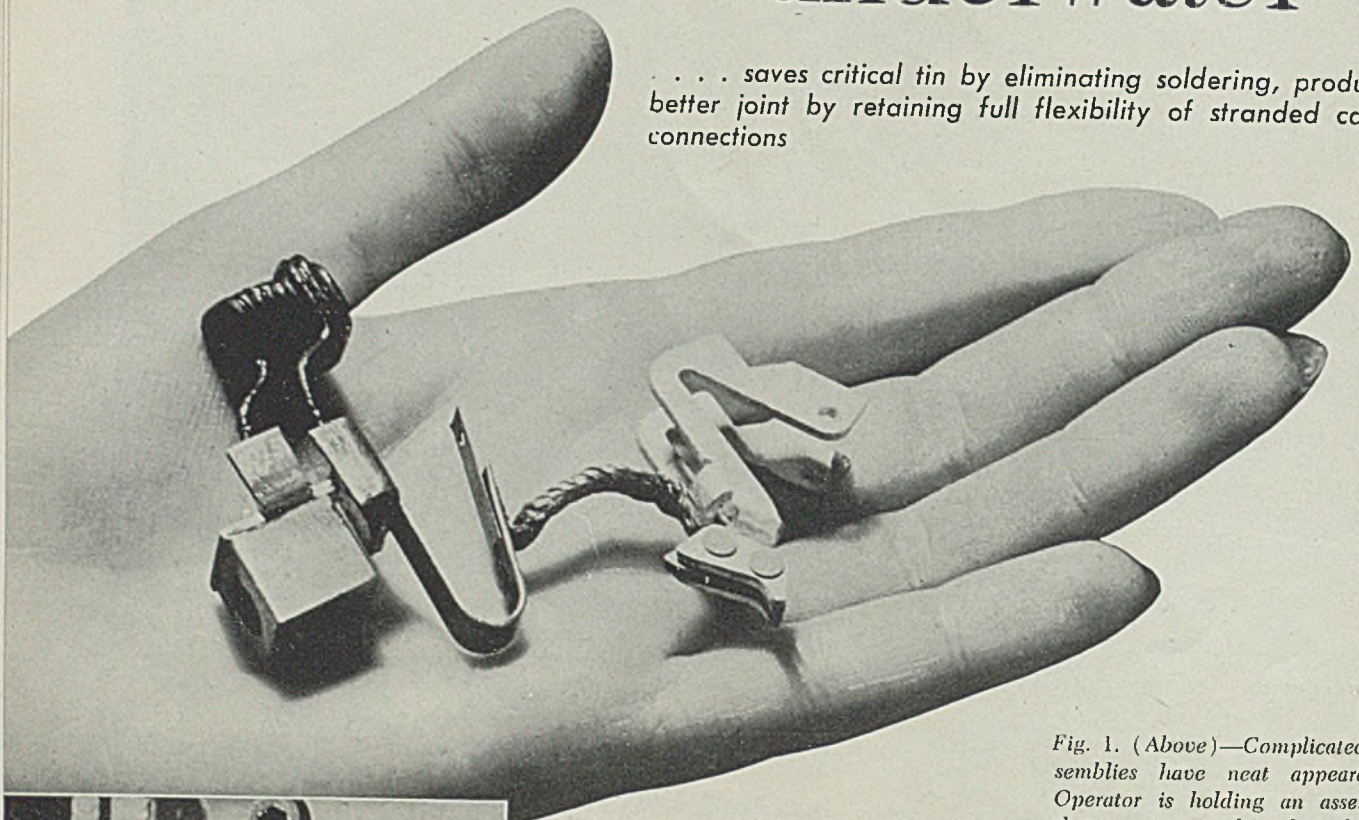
(Above)—Complicated assemblies have neat appearance. Operator is holding an assembly that requires a short but flexible cable. Solder or brazing would fill a portion of the cable with the material used to make the connection, reducing its effective length. Properties of the different parts remain unchanged when assembled with underwater resistance welding
